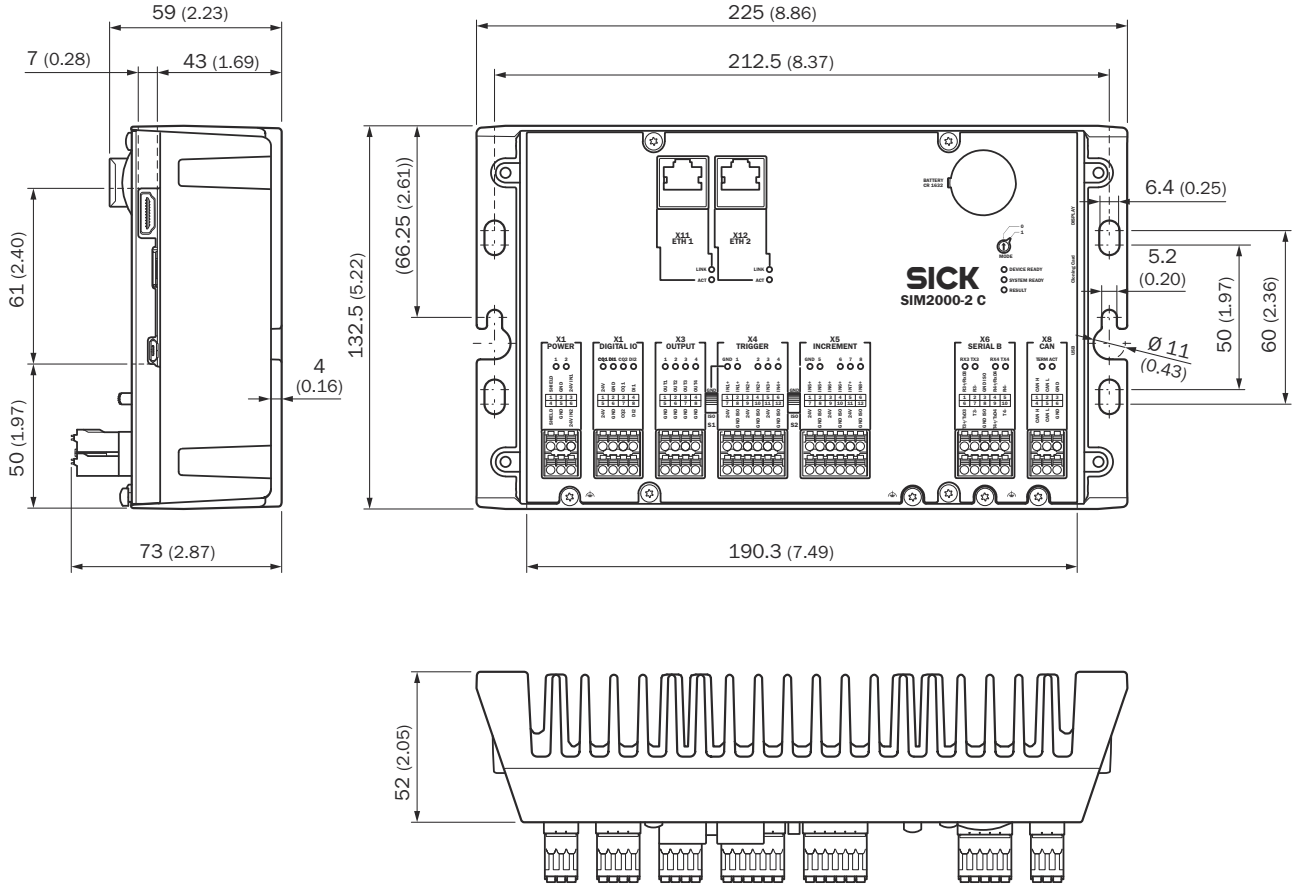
Dimensional drawing for SIM2000-2 C; All dimensions in mm (inch), decimal separator: period
